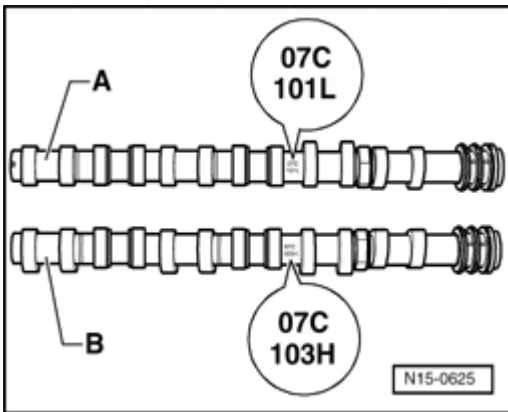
Camshaft Identification Cylinder Bank 2 (Left)
